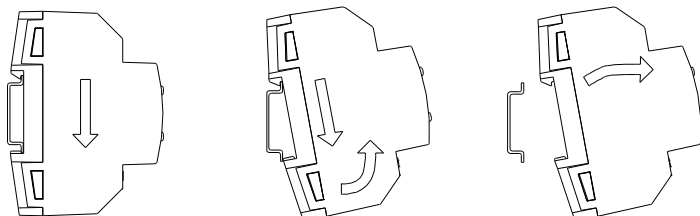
MAXinBOX FANCOIL 4CH2P DIN-rail assembly
